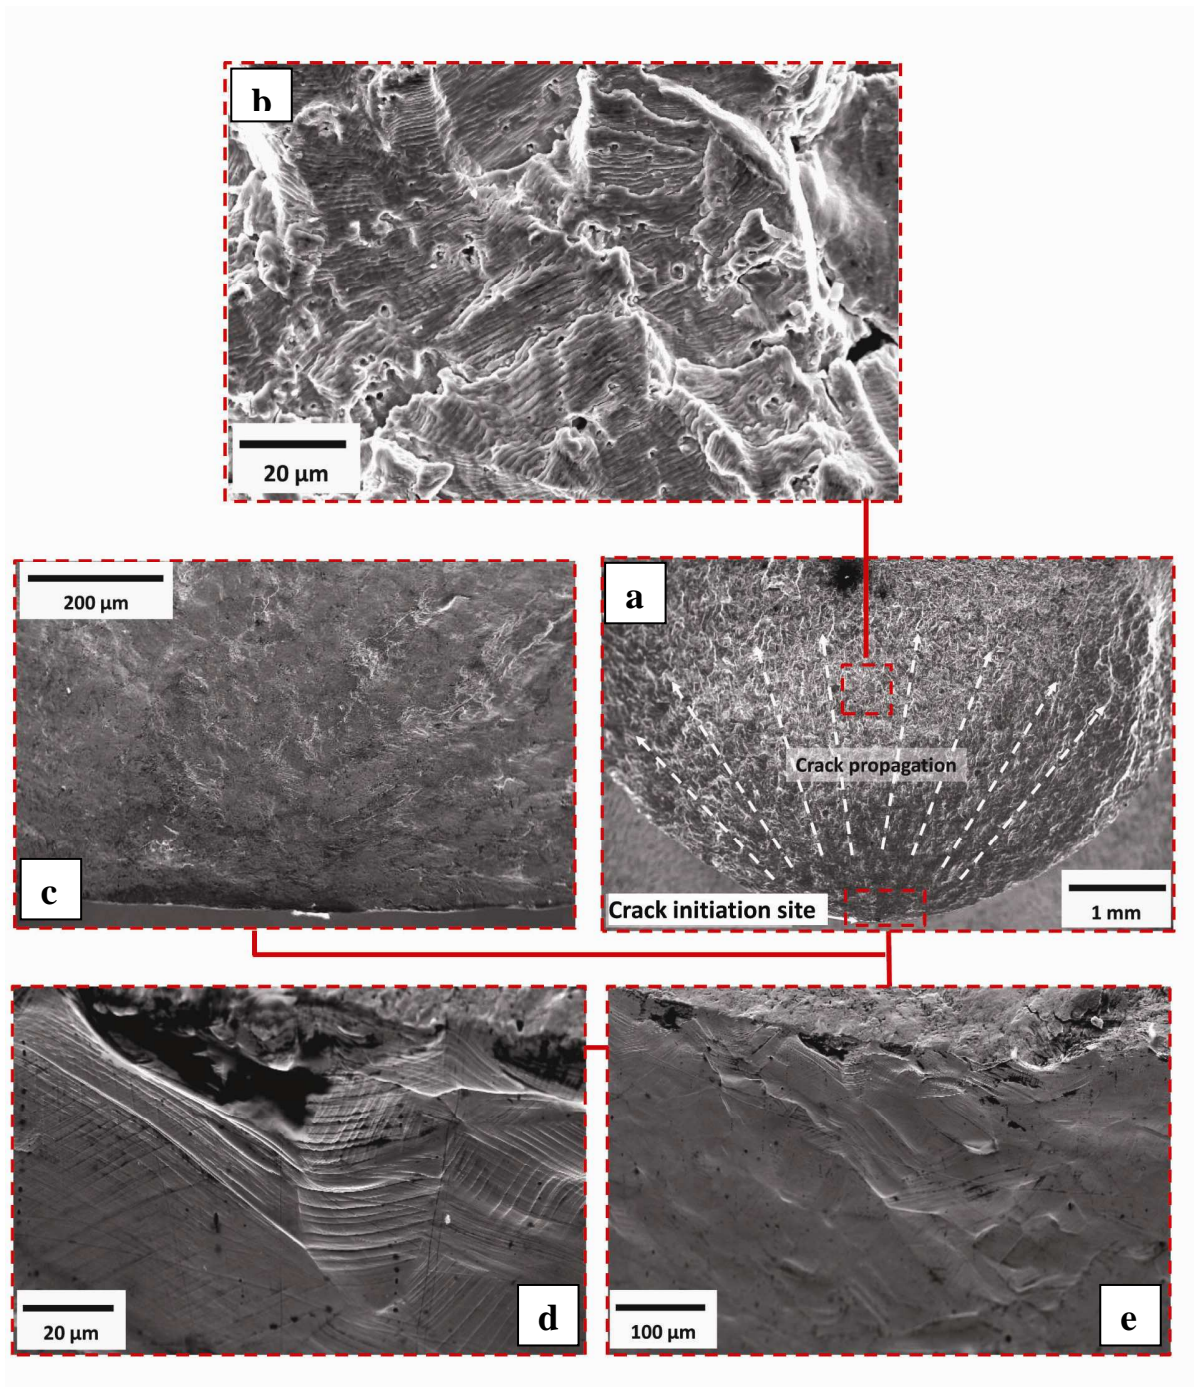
24: a) Fracture surfaces of AISI 316L, Electropolished (3) and fatigue tested at 298 MPa; b) striations.; c) Top view of crack origin zone; d and e) Lateral view of crack origin zone.
